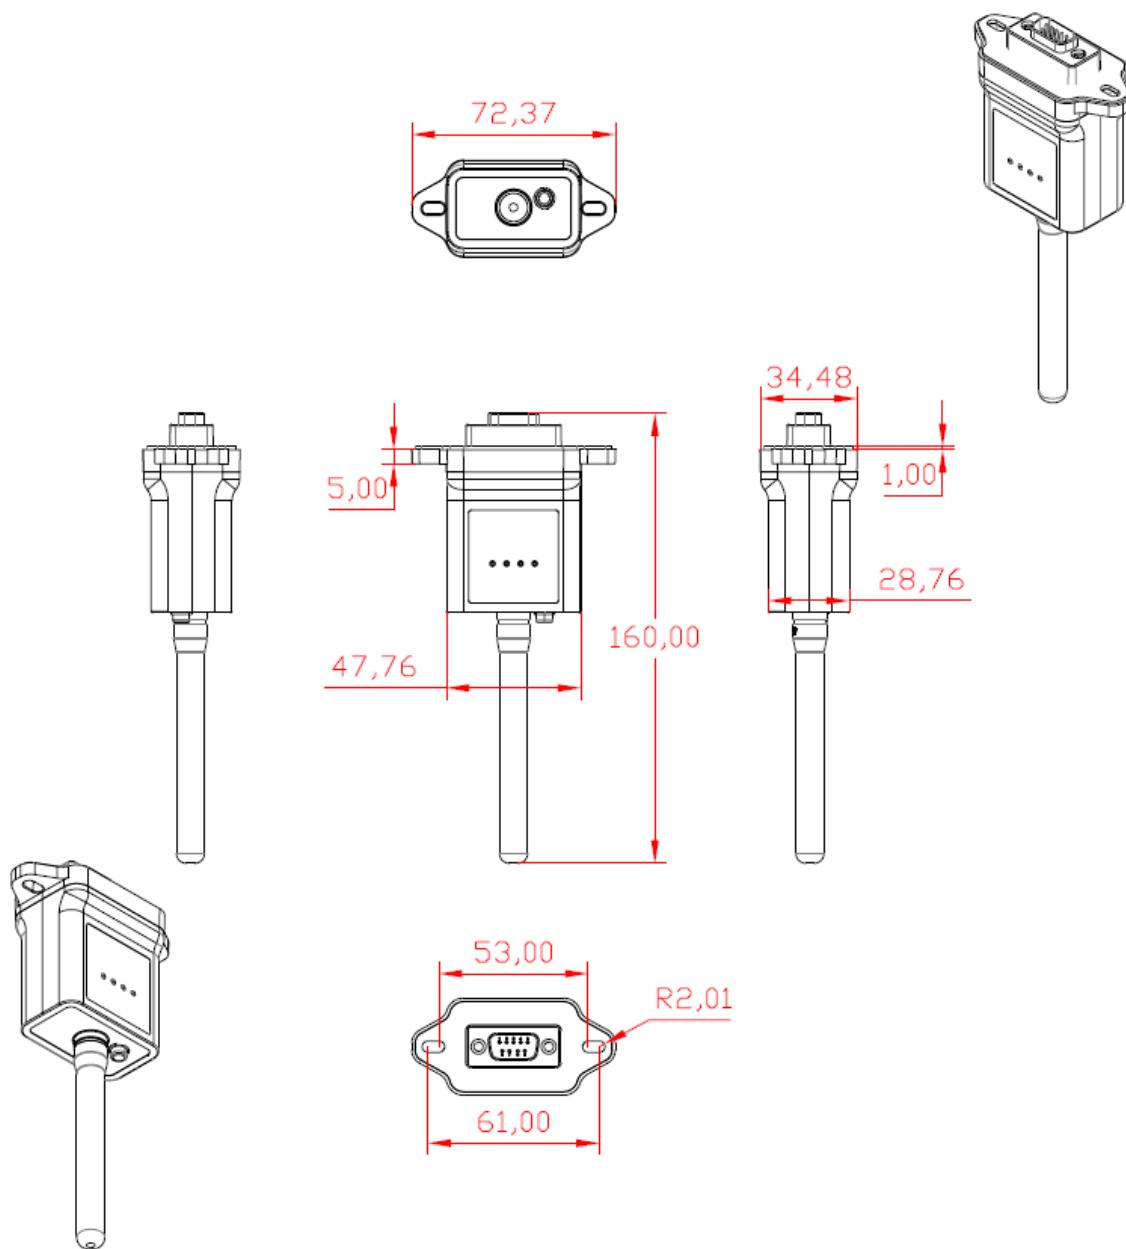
Solar Plug-SGB1-06/-15/-22 Mechanical Dimensions
